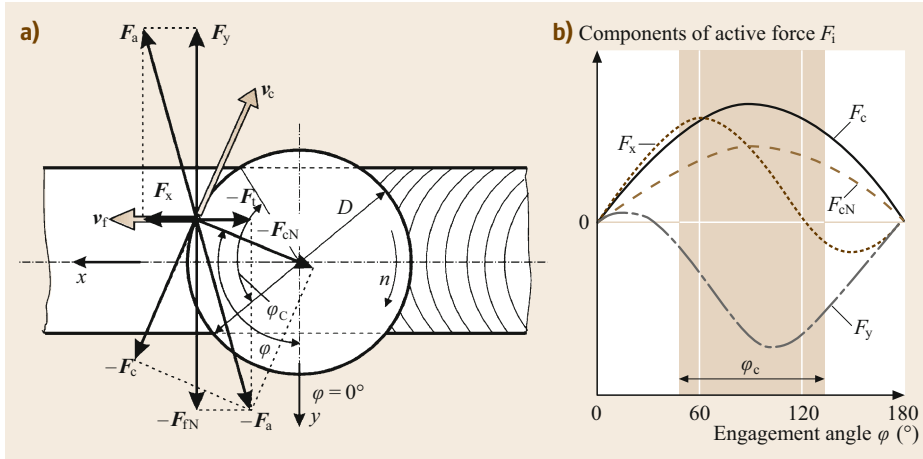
,b Components of cutting force in plain face milling. (a) Force vectors in the working plane; (b) course of forces versus engagement angle; tool specific forces: F_c, F_{cN} ; workpiece-specific forces: F_x, F_y
